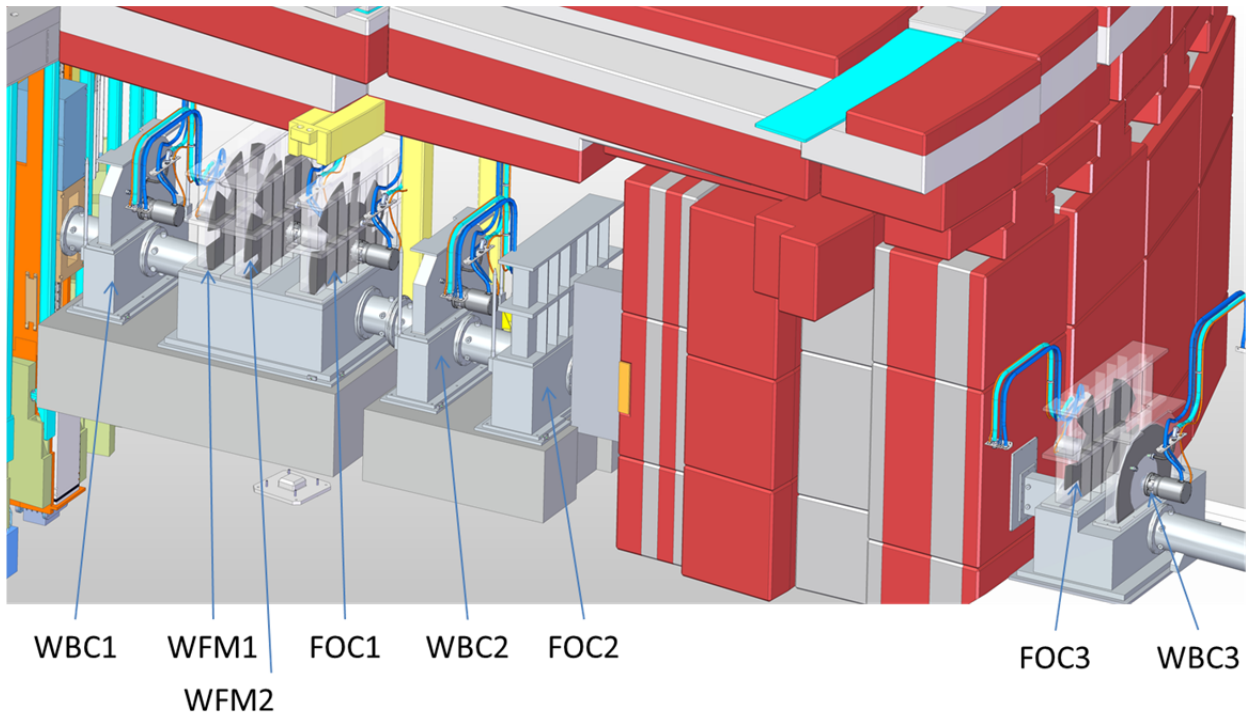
3D concept layout of ESS Freia chopper assemblies
